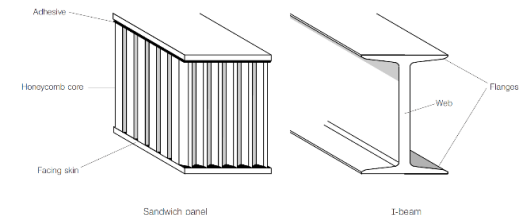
shows the construction of a sandwich panel compared to an I beam.
